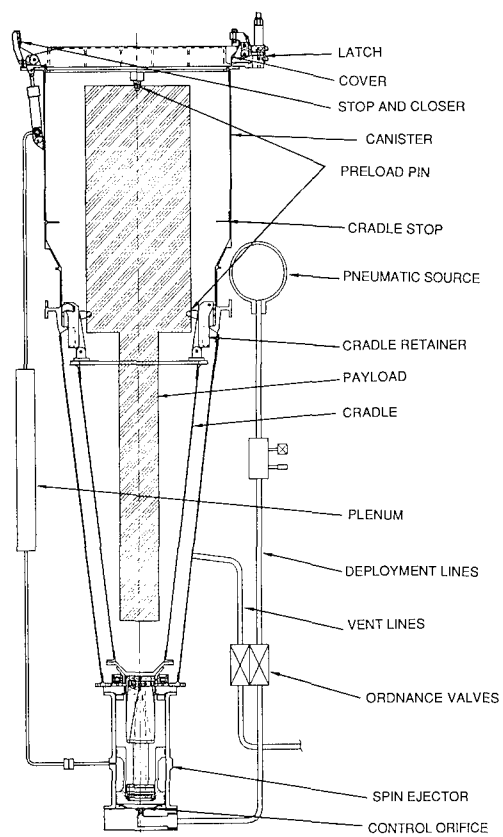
CANISTER ASSEMBLY SYSTEM
